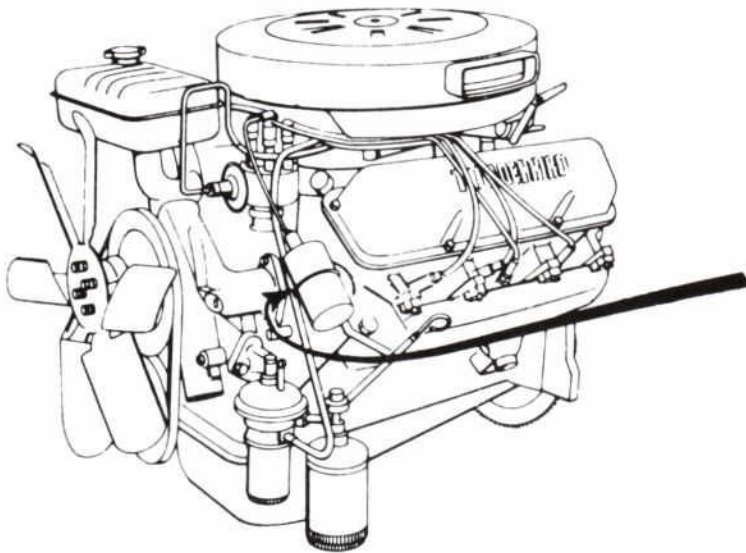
Engine identification tag is installed under coil mounting bracket attaching bolt.
